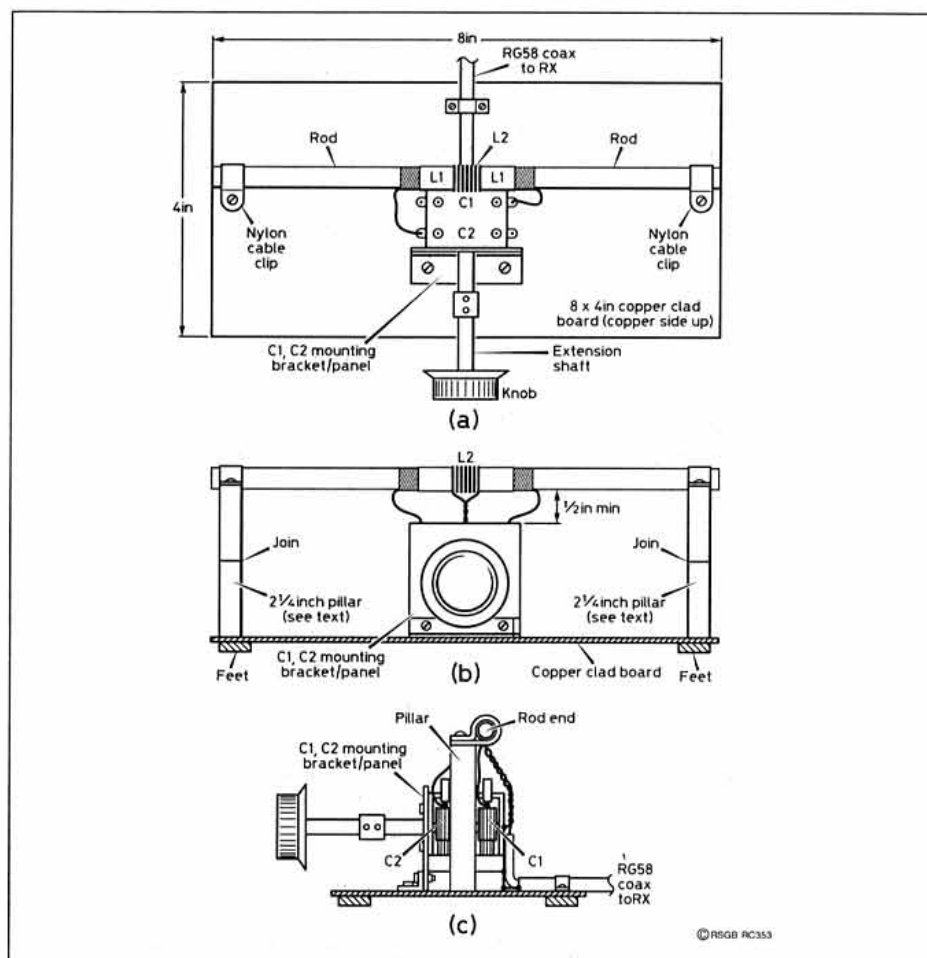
Construction and layout of complete antenna: (a) Plan view (b) Front view (c) Side view.
